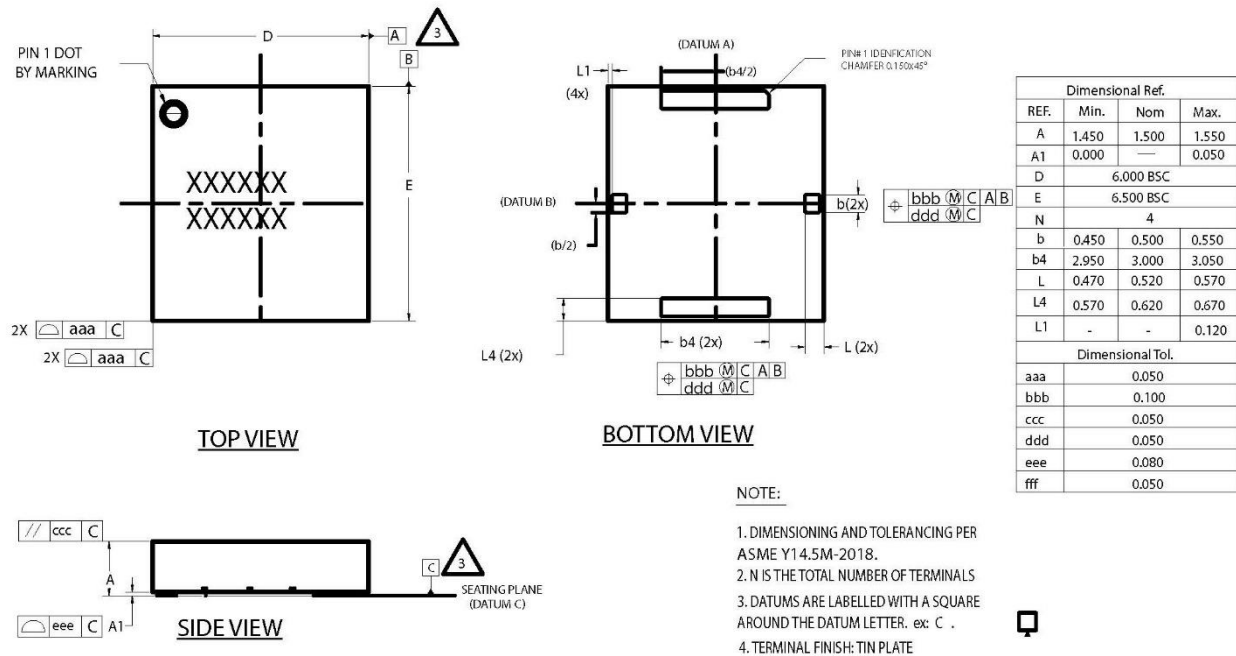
MM9200 QFN Package Drawing (Bottom View, units are mm)
